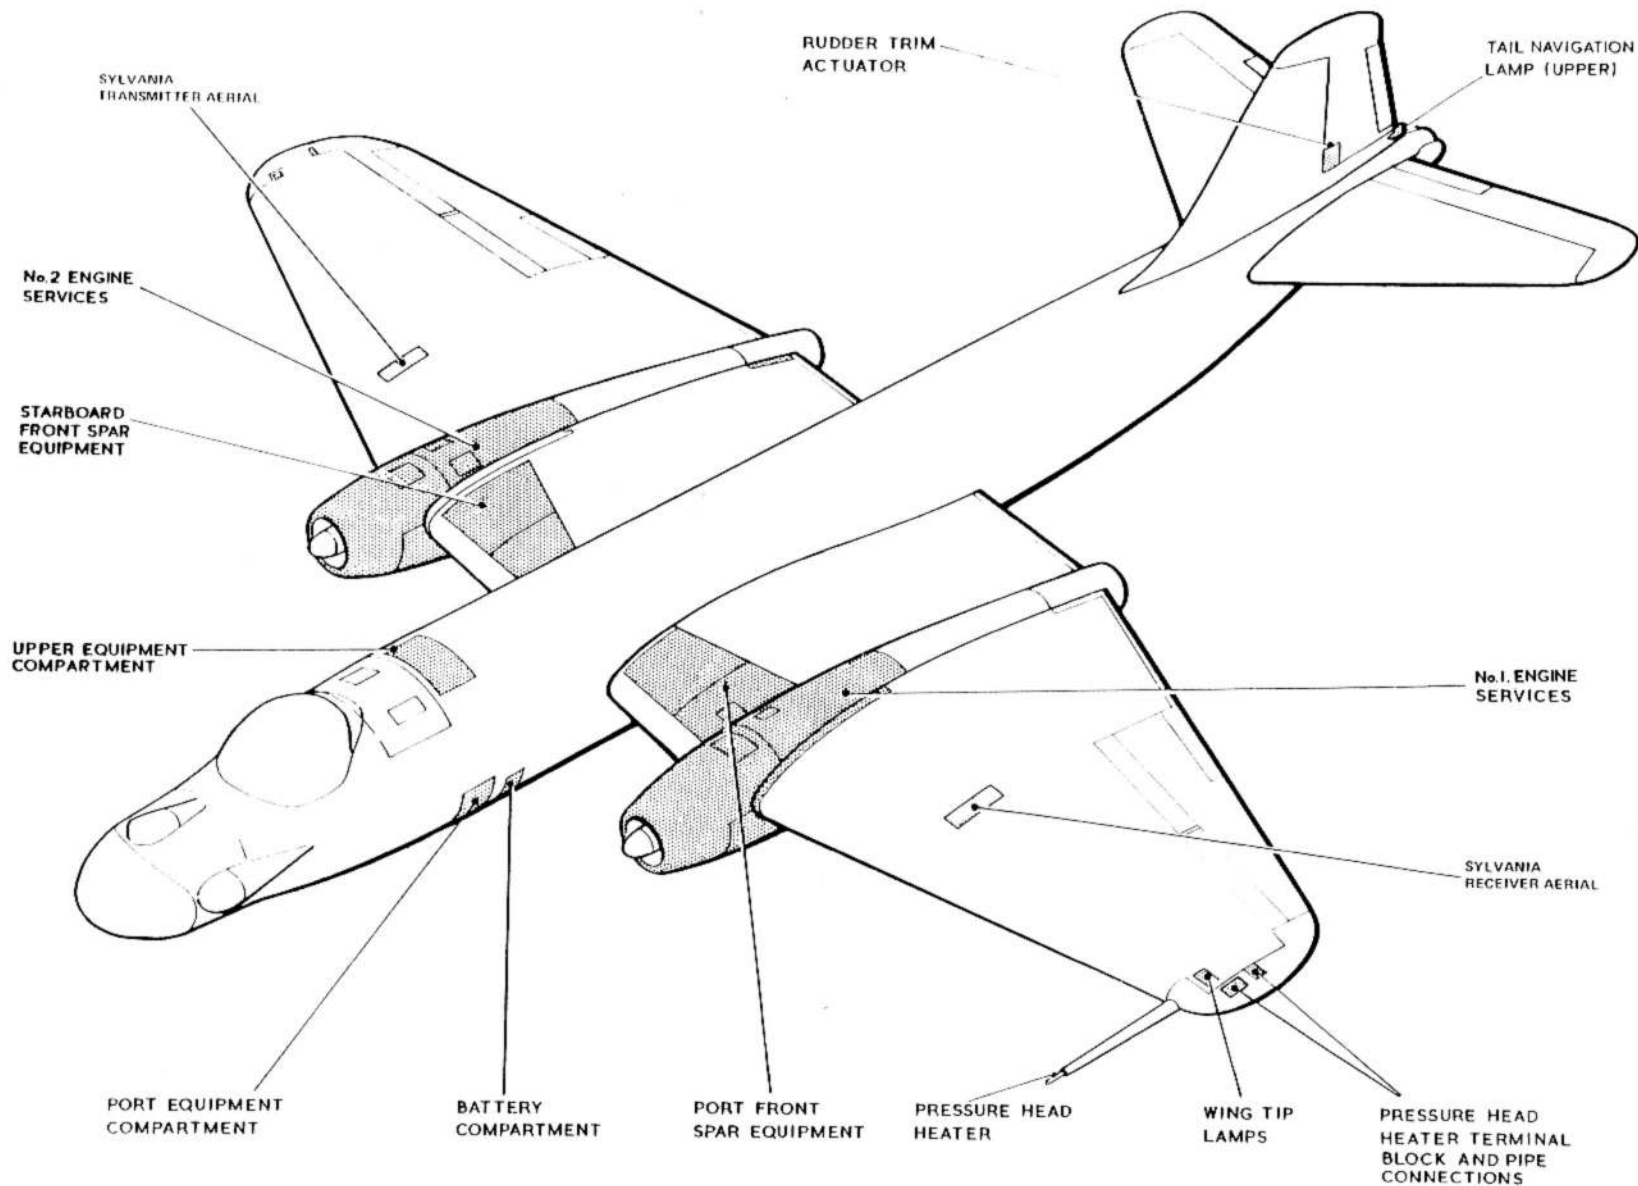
FIG. II. ACCESS PANELS-UPPER SURFACE AND PORT SIDE
